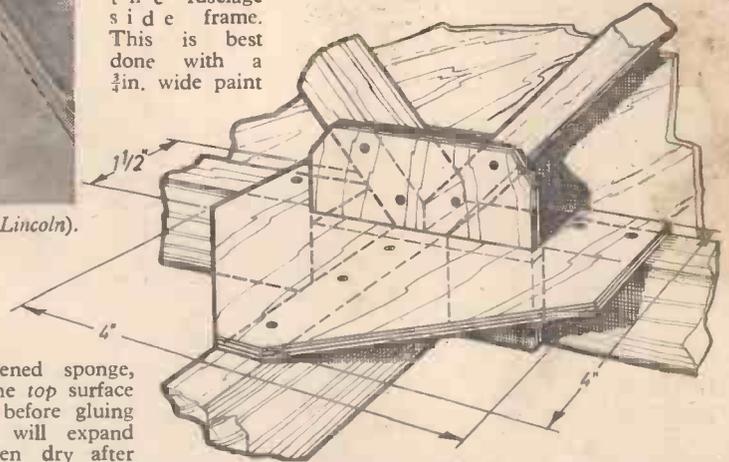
1 1/2 in. wide x 2 1/2 in. high x 1/2 in. thick ply gusset slotted over cross member and plate gusset recessed around it.
